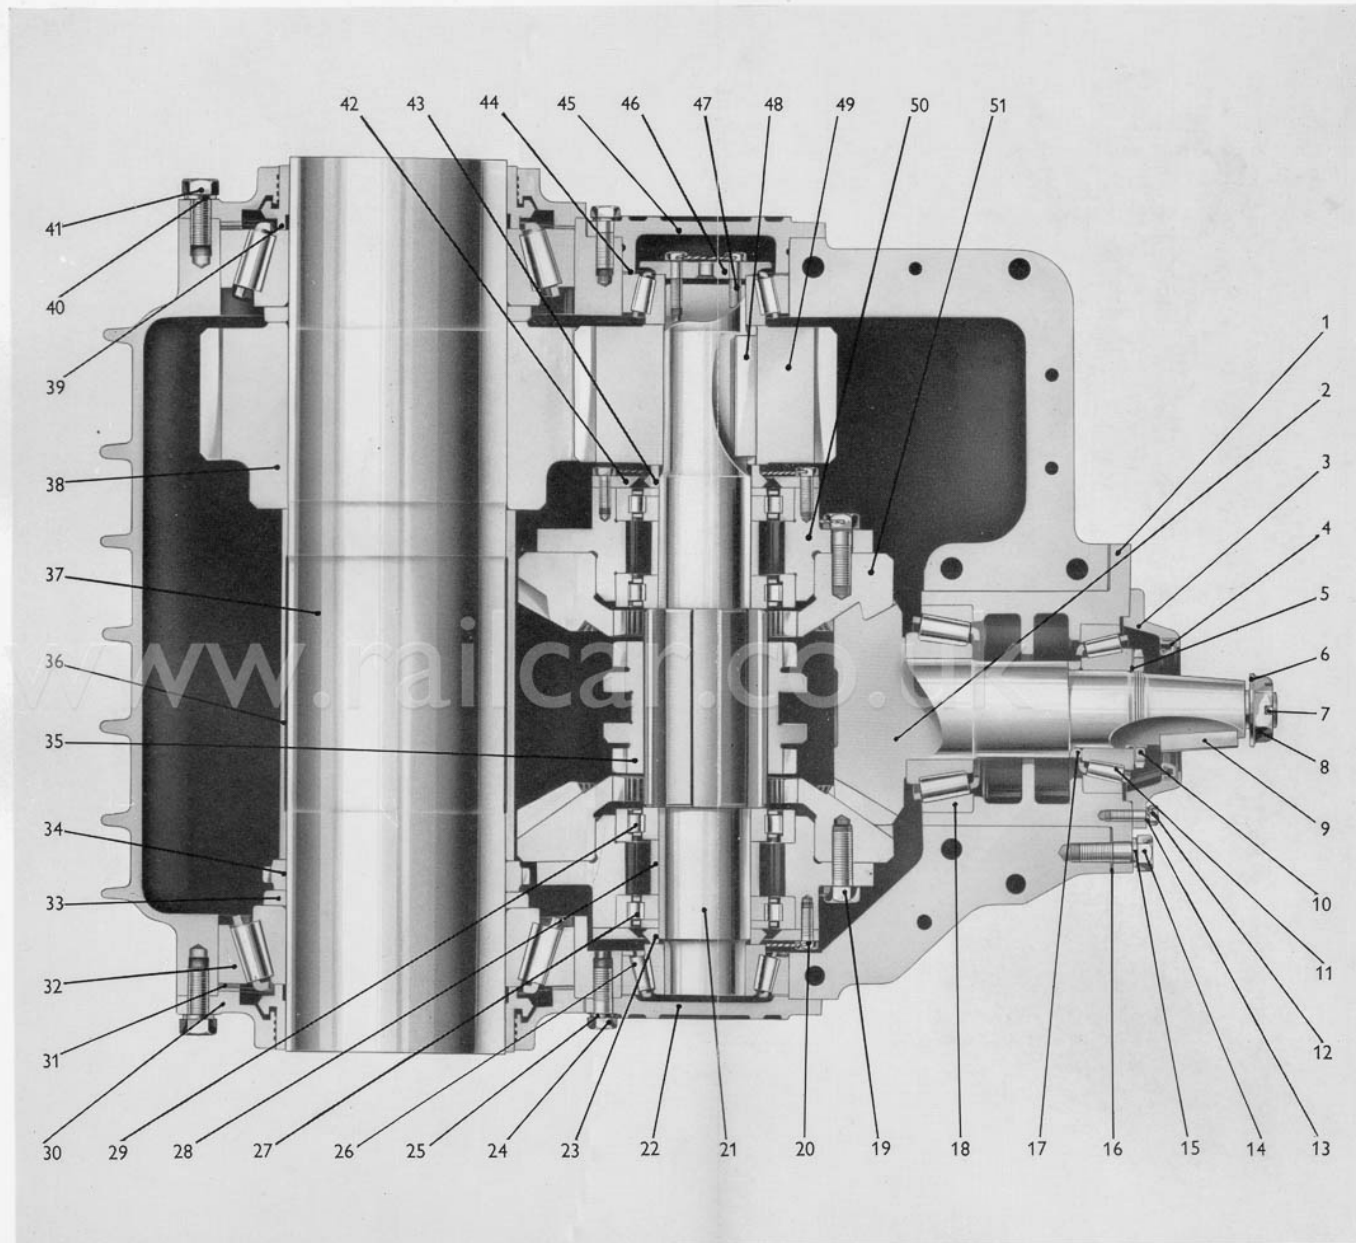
SECTIONAL ELEVATION THROUGH FINAL DRIVE
